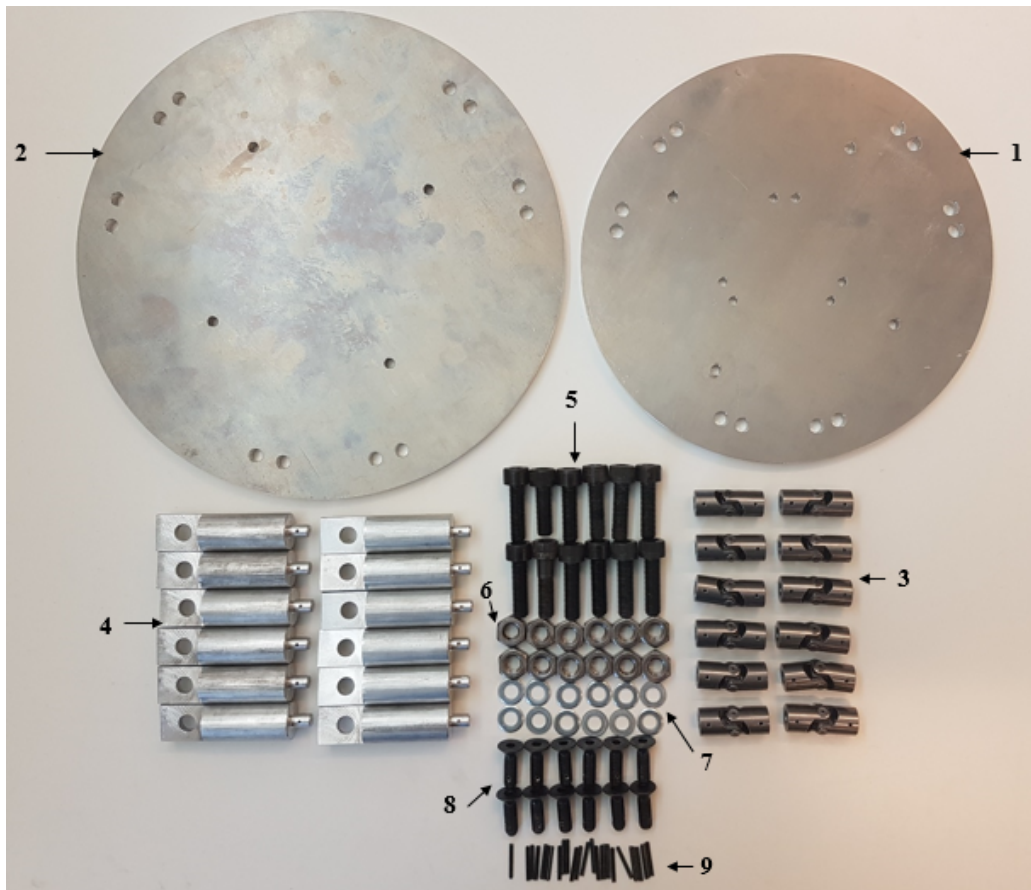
An overview of all the components (excluding the linear actuators) used for the final assembly of the arthrometer. This includes the top platform (1), the bottom platform (2), 12 universal joints (3), 12 linking parts (4), 12 M10x35 mm bolts (5), 12 Ø10 mm nuts (6), 12 washers (7), 12 M8x25 mm bolts (8), and 24 pins (9).
